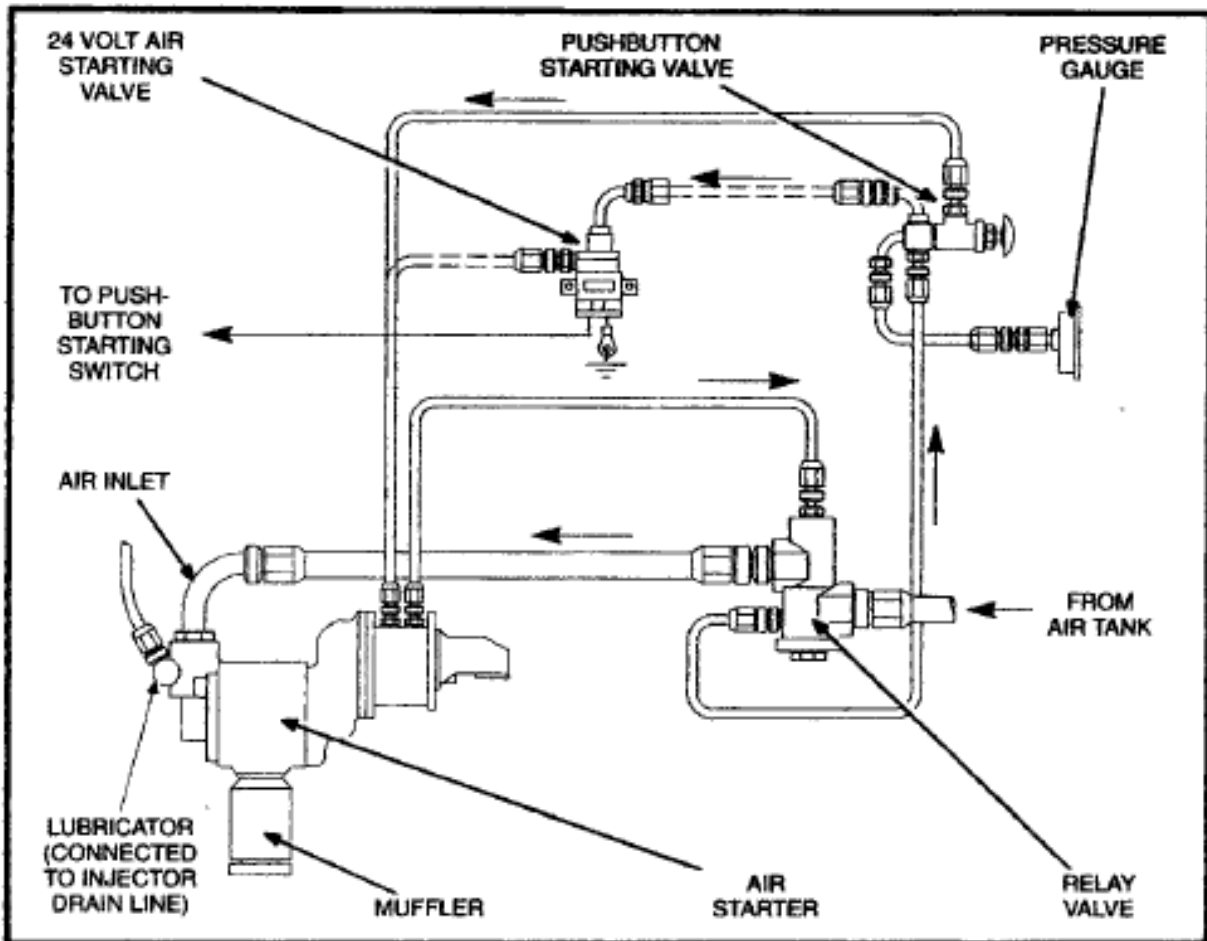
TYPICAL PIPING ARRANGEMENT FOR AN AIR STARTER
